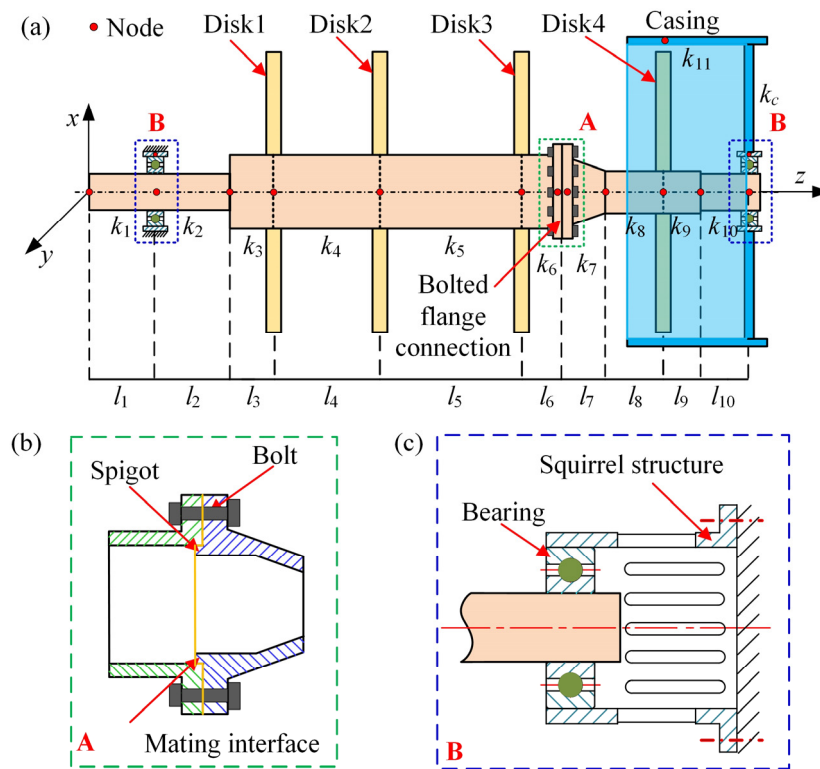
Schematic diagram of the bolted joint rotor-casing coupling system. (a) The coupled rotor-casing system, (b) bolted flange connection, and (c) squirrel structure with bearing.
